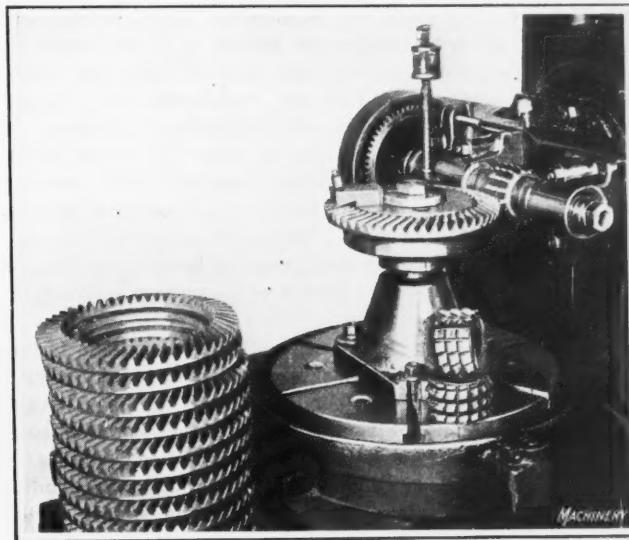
Chamfering Gear Teeth on the Hobbing Machine by the Use of a Special Hob
